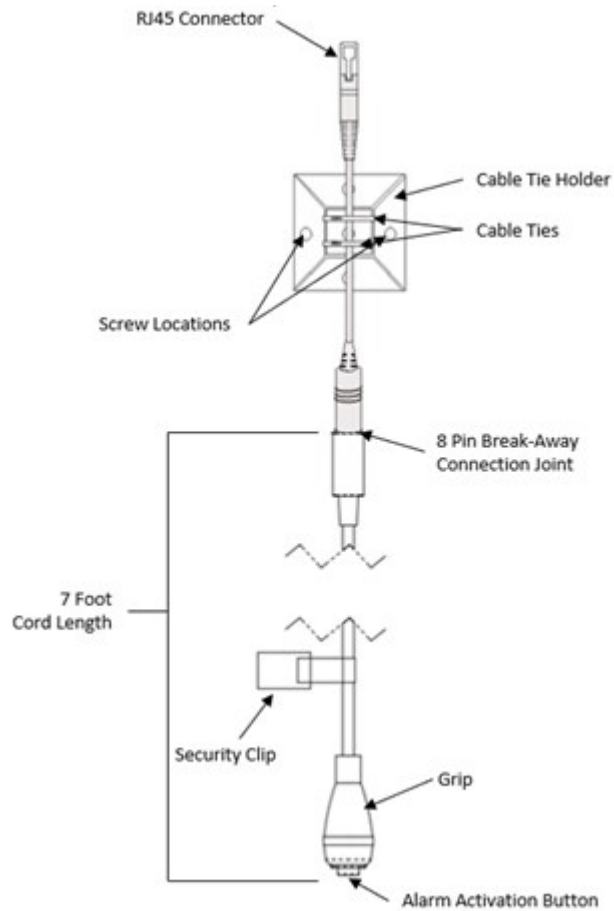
Remote Push Button Call Cord Component Details (0900-240 Single Cord shown)
